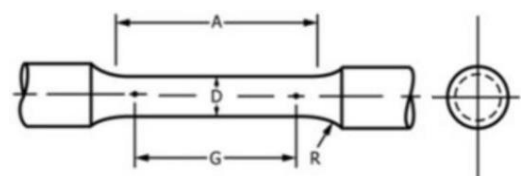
Dimension of tensile strength specimen ASTM E8.
